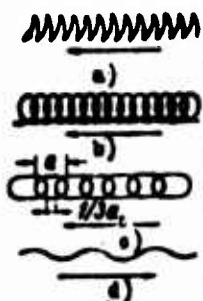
Kinematics of movement of the burner: a) zigzag-like; b) spiral; c) pivot; d) straight.
